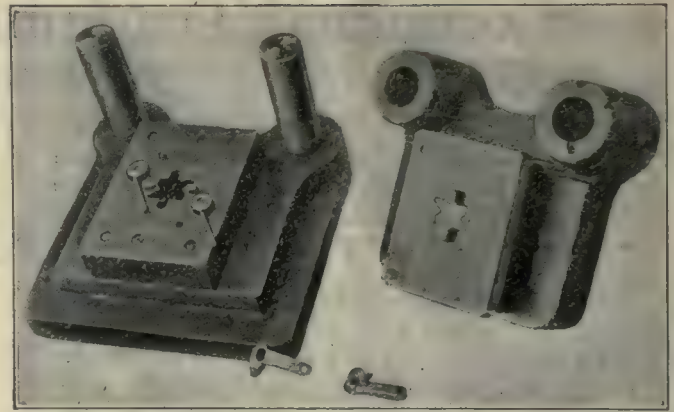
PRESS TOOLS FOR TRIMMING AND SHAVING THE LEVER
